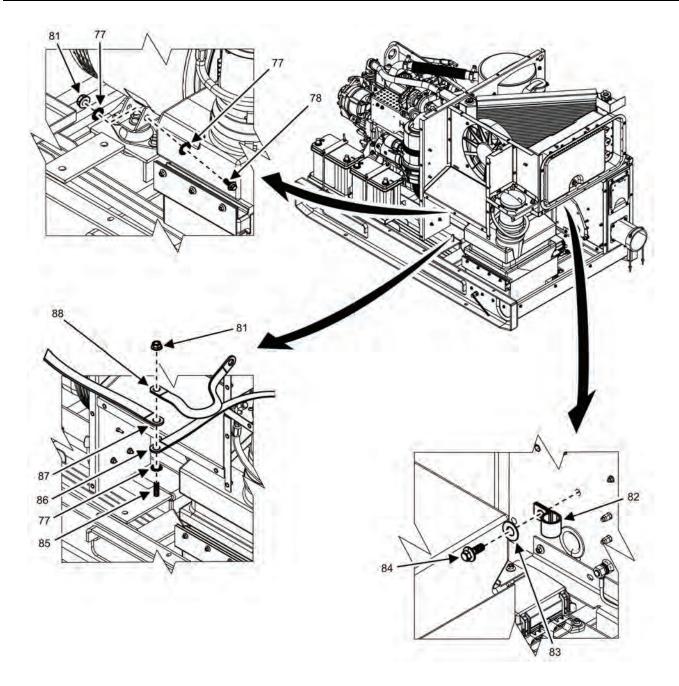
Engine Wiring Harness (Sheet 12 of 15).
